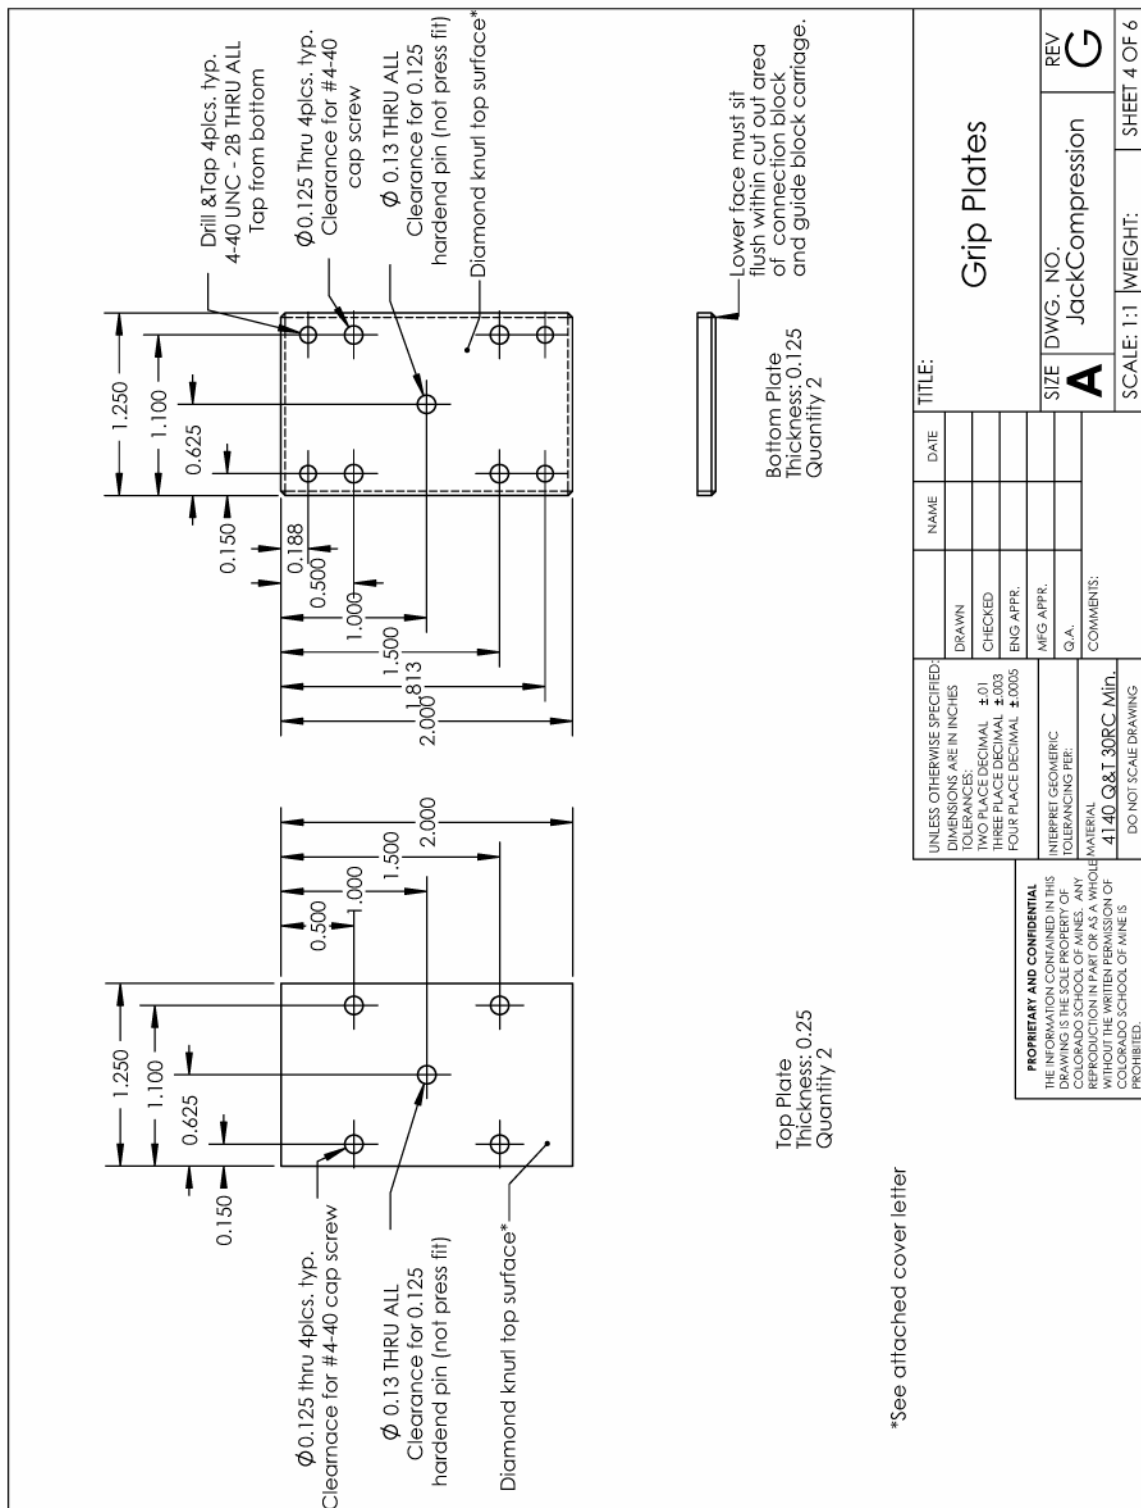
Shop drawing of grip plates. Plates were textured with a diamond cut pattern to reduce sample slip. Samples were clamped in between grip plates.
